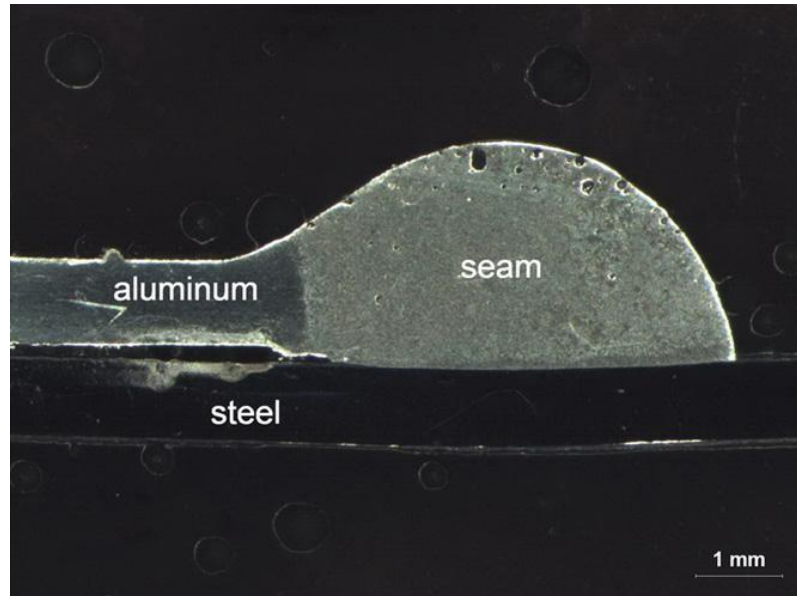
Typical cross-section of the aluminium–steel lap joint
